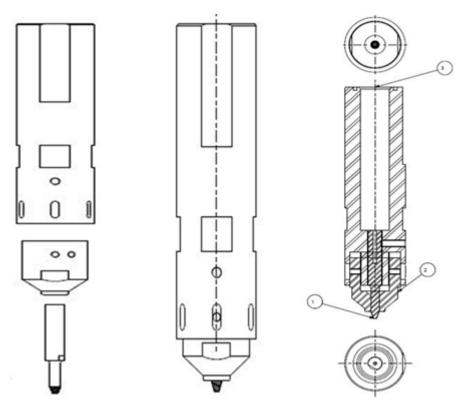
Figure Tool assembly Exploded view (left); Assembly (centre); Section view (right) [63]
